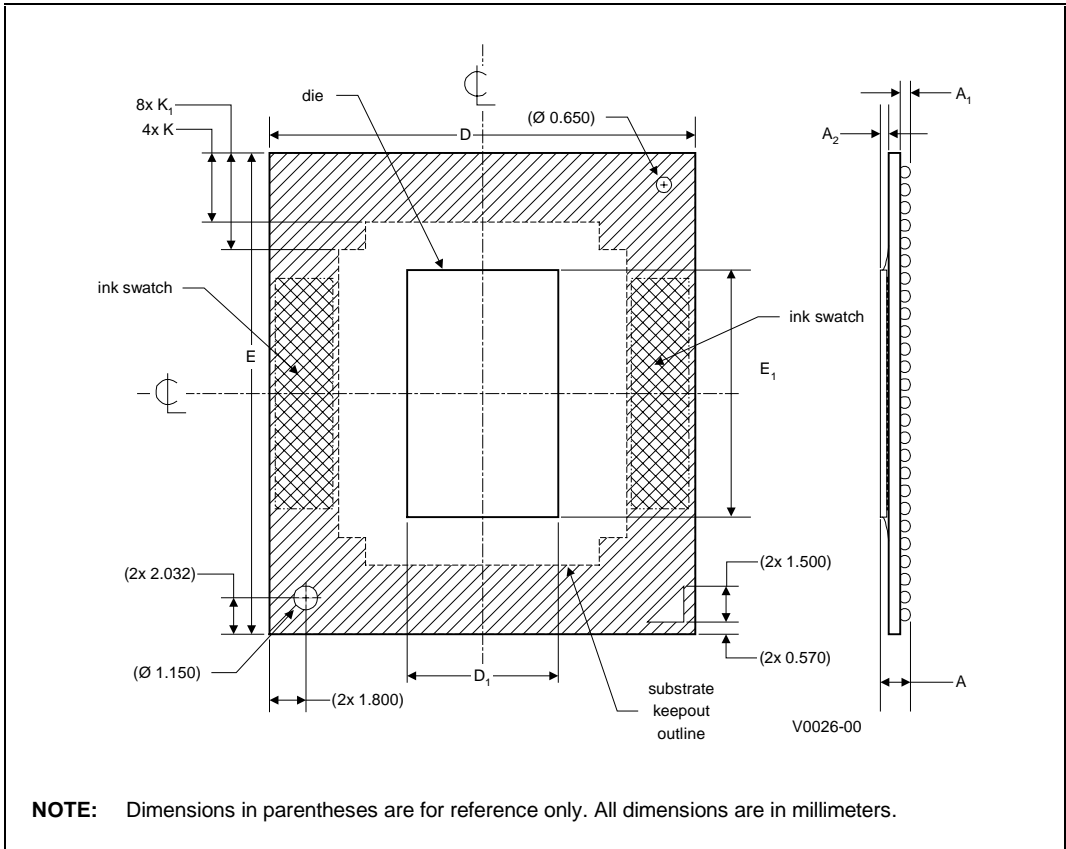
Surface-Mount BGA1 Package - Top and Side View
